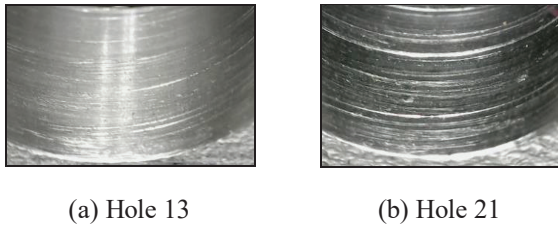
(a) and (b) show the surface finishing for Hole 13 and Hole 21
